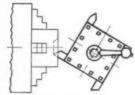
Same tool shown in photos No. 1 and No. 2 being used for inside chamfer.
